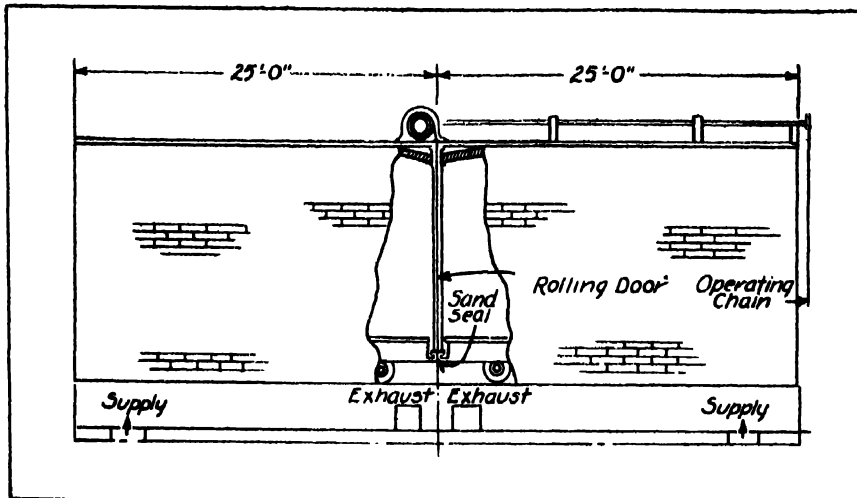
CORE OVENS ARE BUILT SO THAT WHILE THEY CAN HOLD THE LONGEST MOLDS THEY CAN BE DIVIDED AND ONLY HALF OF THE OVEN USED WHEN ALL IS NOT NEEDED
